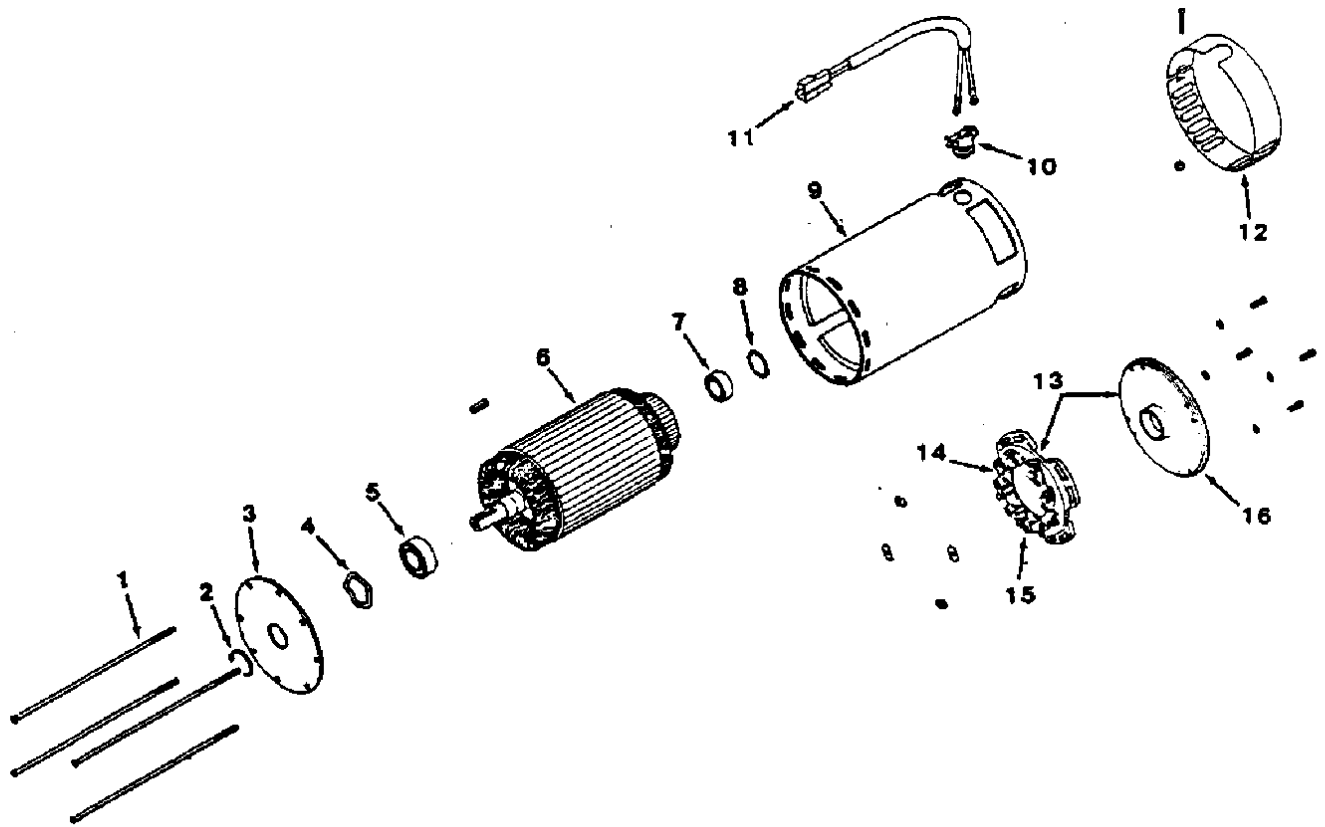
SCRUB BRUSH MOTOR BREAKDOWN, HEAVY DUTY
